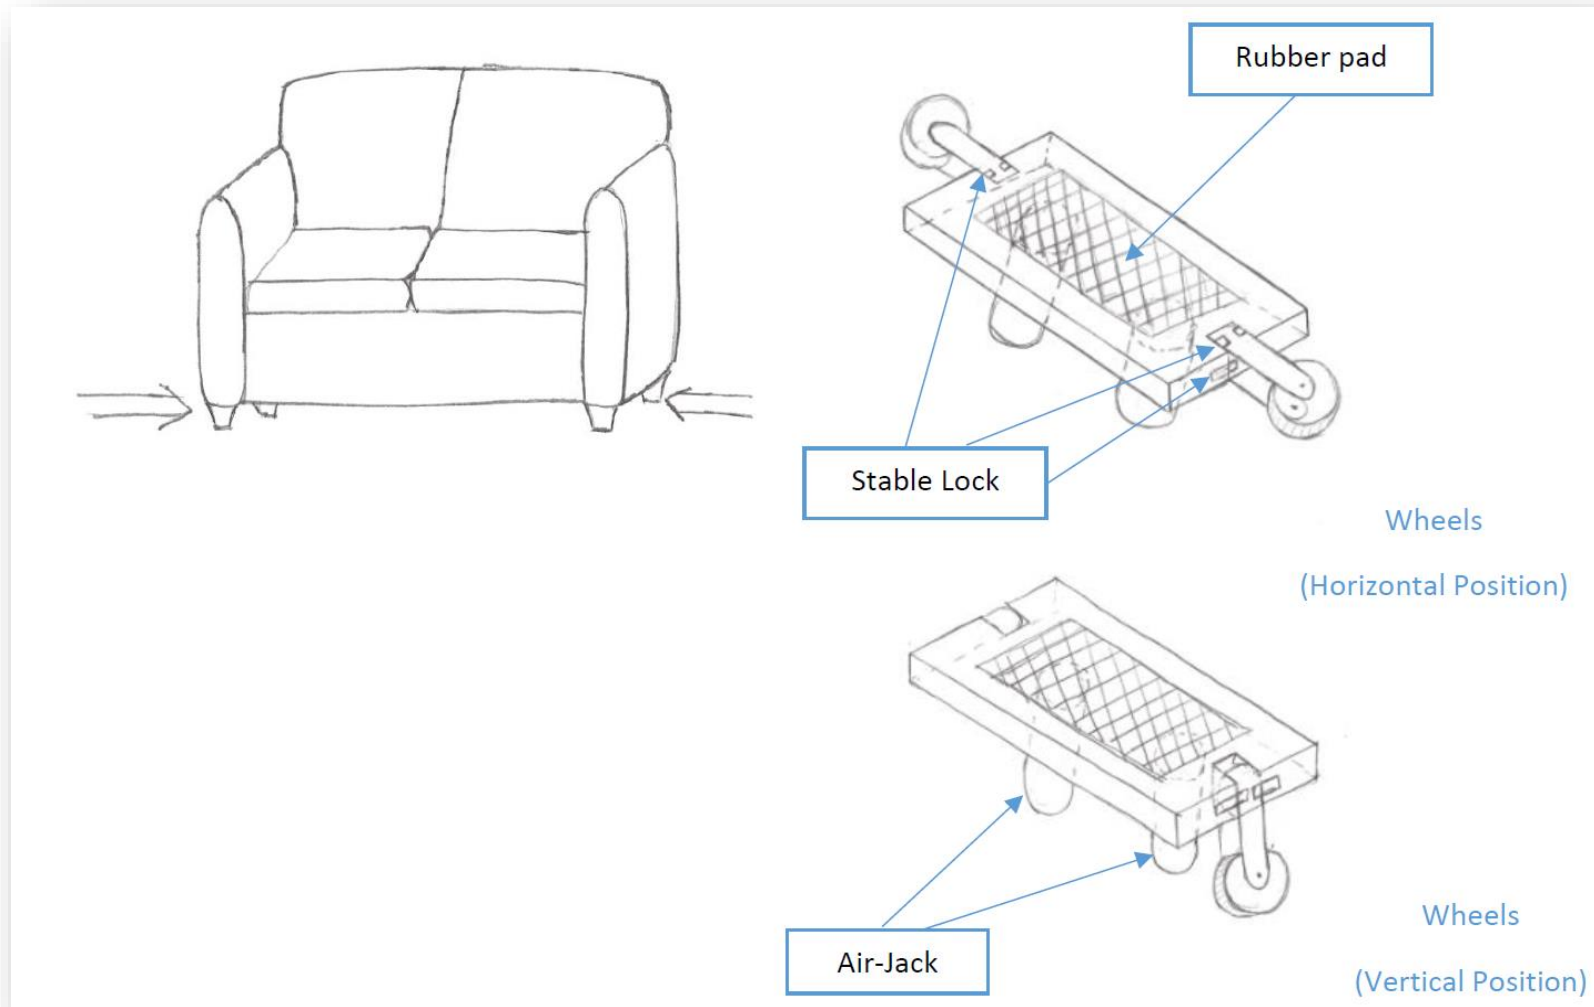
Design concept 4 -- Mini pads with foldable wheels
